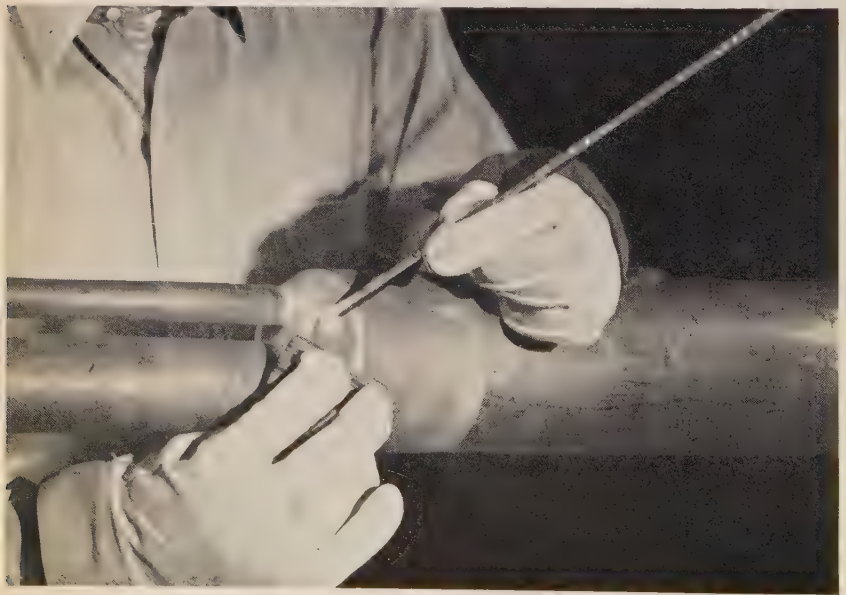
Applying Sealing Solder to a Branched Cable Joint.
